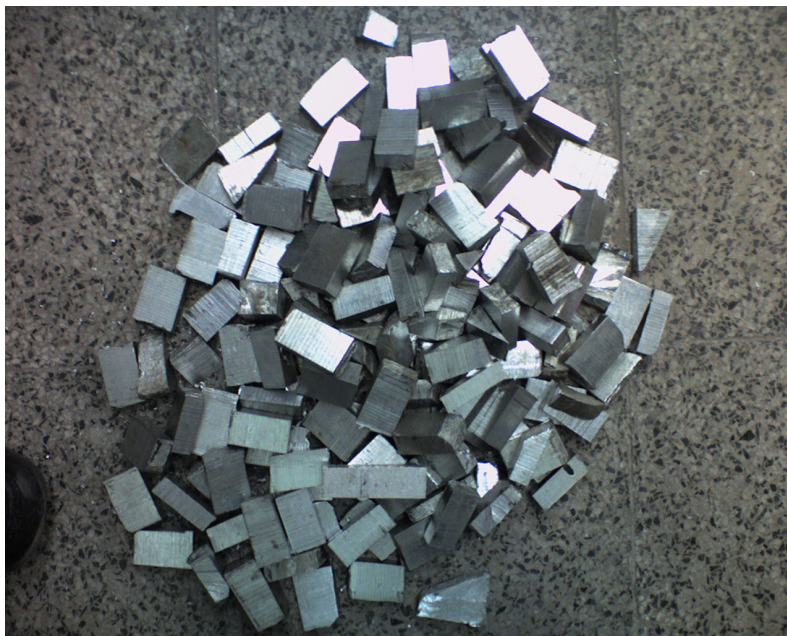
Sliced zinc pieces using a Bosch spiral saw
